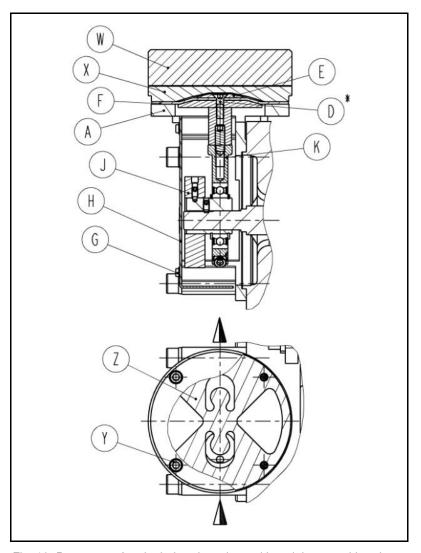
Pump parts for single-head versions with stainless steel head *not for .9 versions
